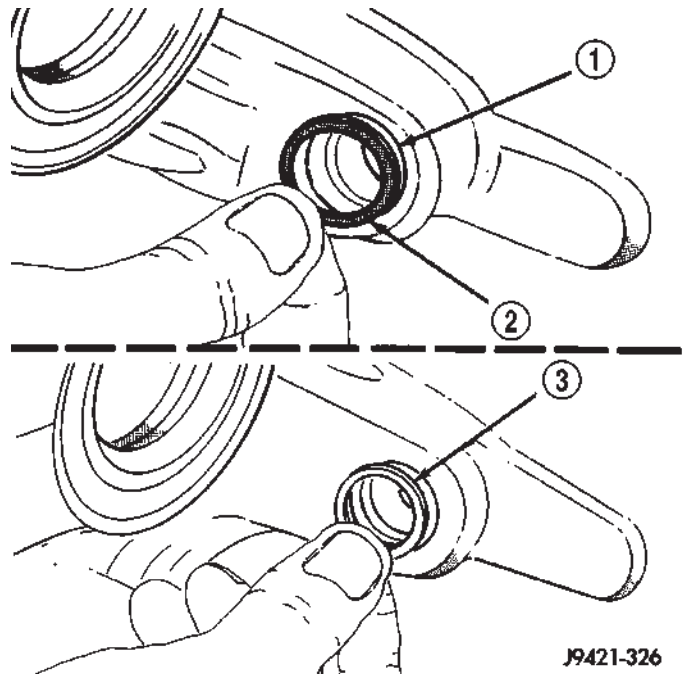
Sector Shaft O-Ring And Retainer Installation
